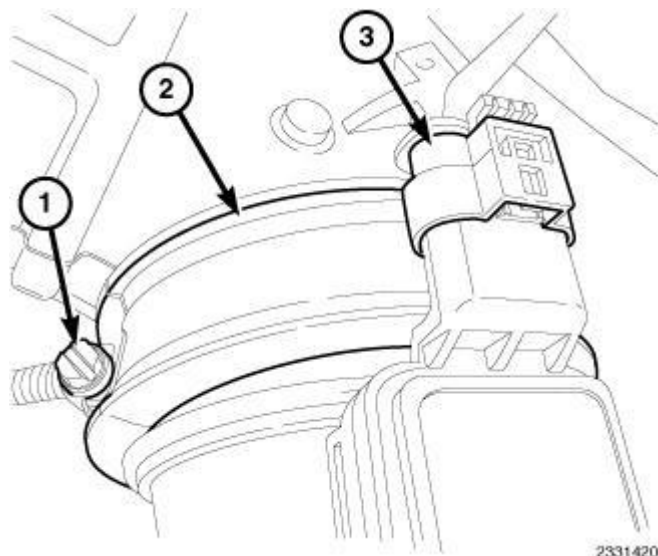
Air Cleaner Upper Support Bracket Retaining Bolt
